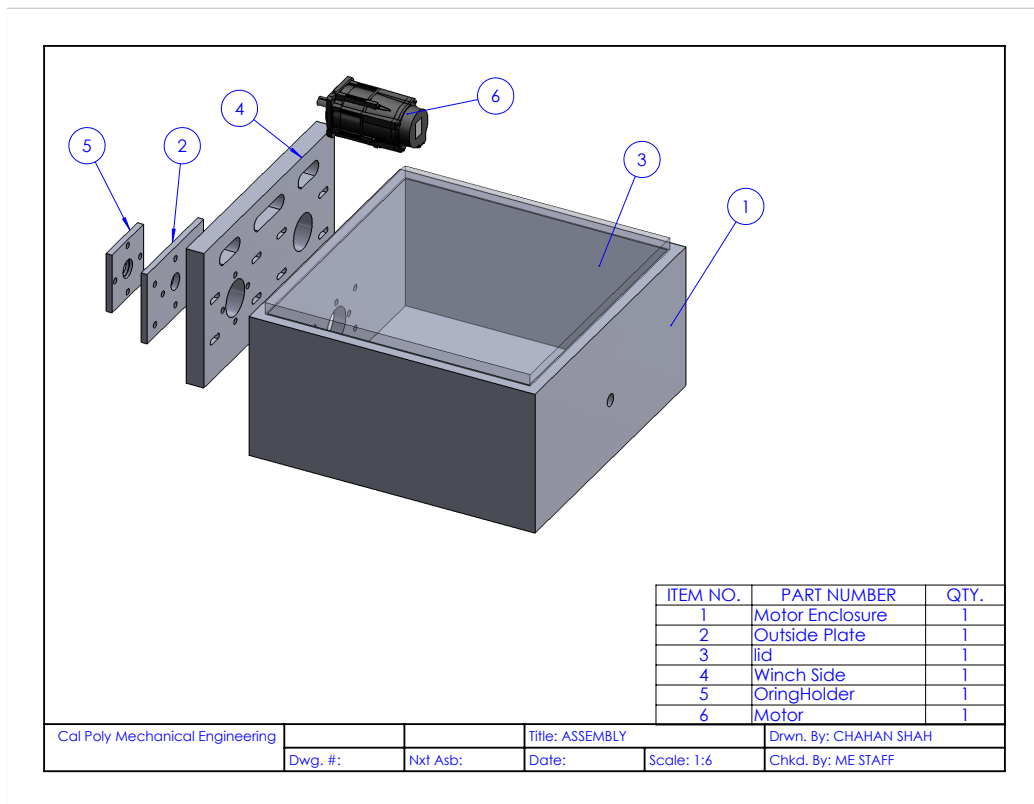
Simple drawing of the assembly showing how the different pieces will connect together.
